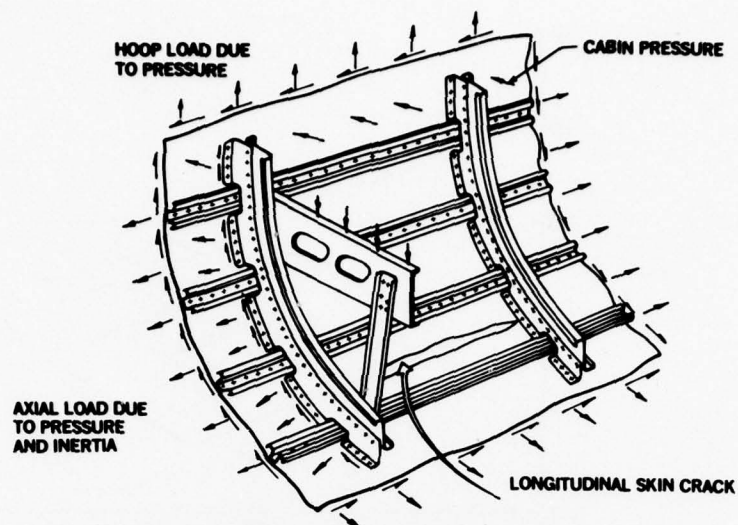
FUSELAGE COMPLEX STRUCTURAL CONFIGURATION
